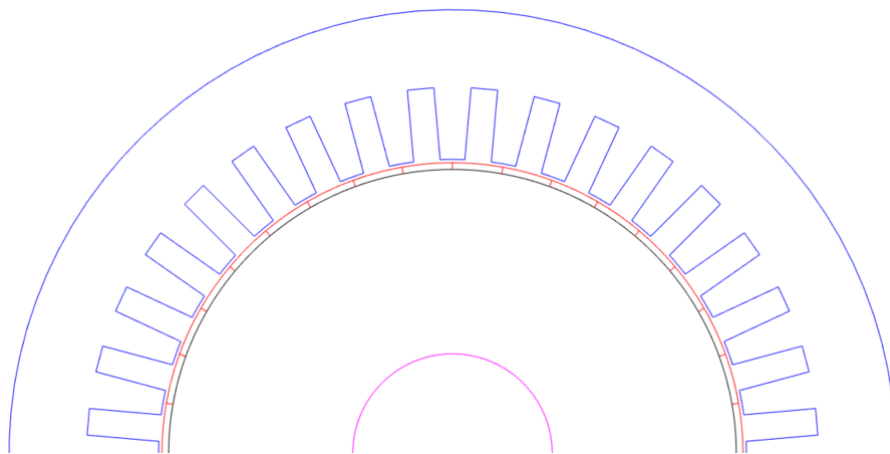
Sketch of the 36s36p stator and rotor geometry.
